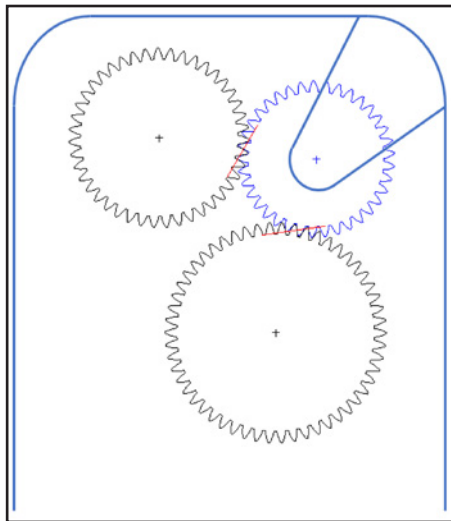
Gearbox with an idler set—input at the top (CCW rotation) and output at the bottom.
